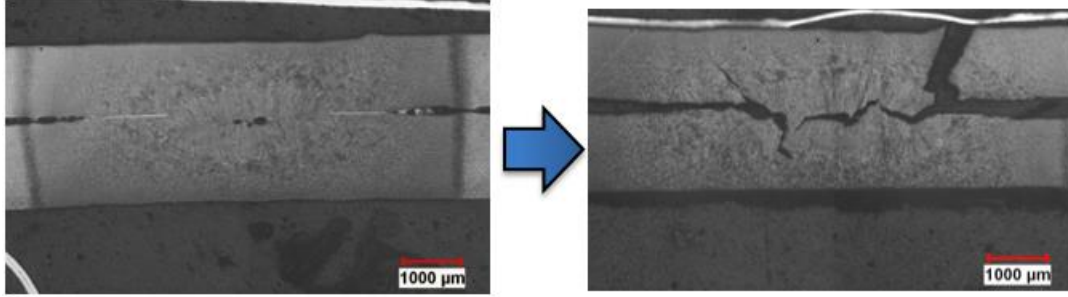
As-delivered USIBOR weld: base material tearing around the nugget (red arrow) after cold forming
